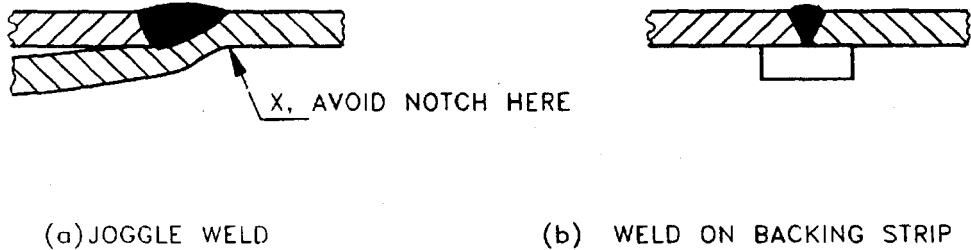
TYPES OF MAIN LONGITUDINAL BUTT WELDS
